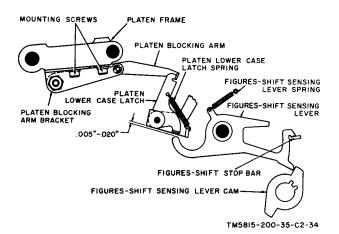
Platen blocking arm bracket adjustment requirement.
